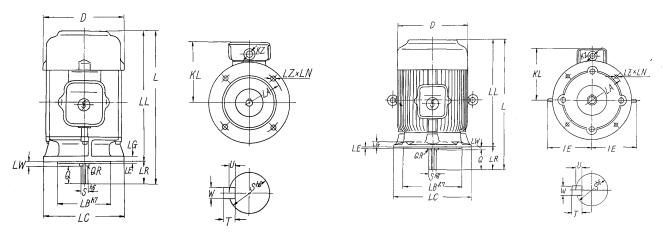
Outline dimensions of flange type motor (Frame No. 61 L~71 L)
